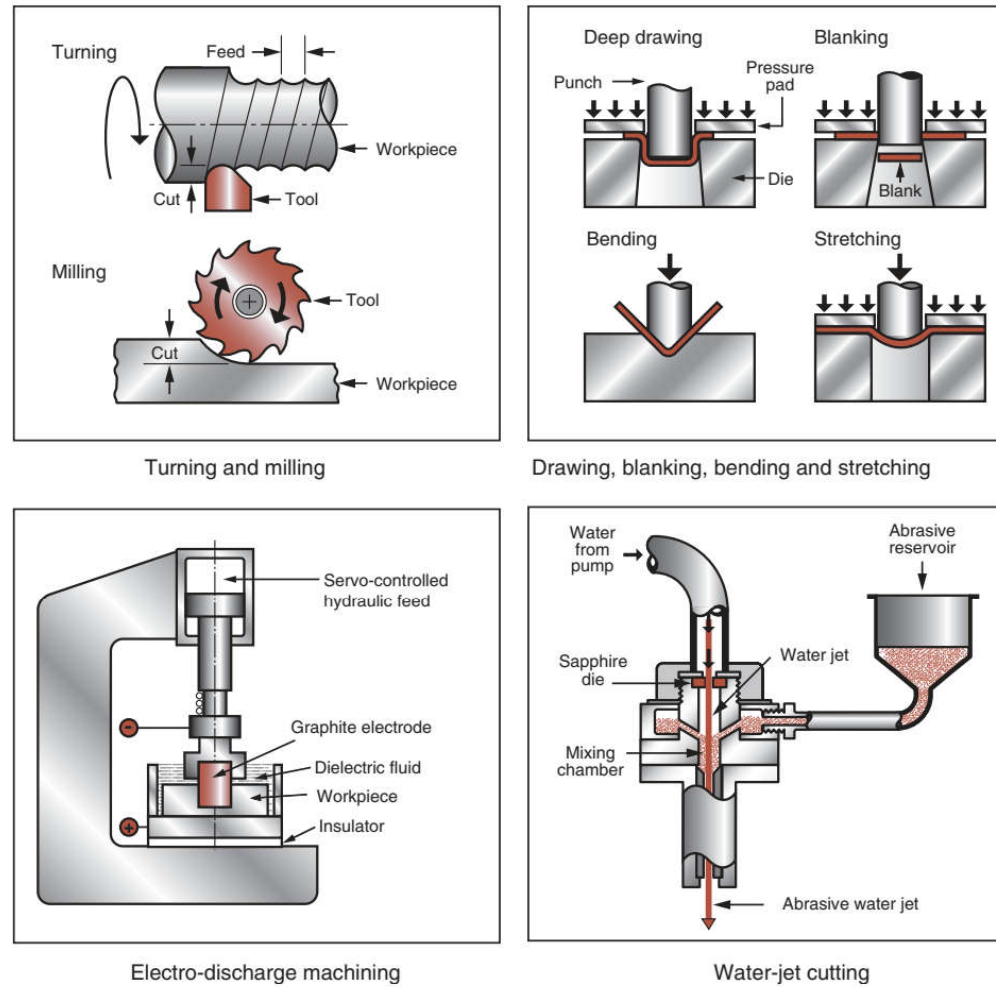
Machining operations. In turning and milling, the sharp, hardened tip of a tool cuts a chip from the workpiece surface. In drawing, blanking, bending and stretching, a sheet is shaped and cut to give flat and dished shapes. In electro-discharge machining, electric discharge between a graphite electrode and the workpiece, submerged in a dielectric such as paraffin, erodes the workpiece to the desired shape. In water-jet cutting, an abrasive entrained in a high speed water-jet erodes the material in its path.
